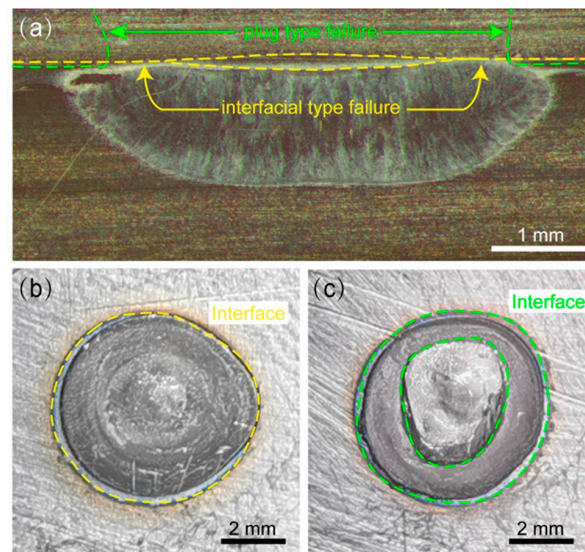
Fracture interface morphologies and fracture locations: (a) nugget morphology of the joint, 8.0 kA, 180 ms, 0.35 MPa, (b) macroscopic fracture interface of interfacial fracture mode, 7.0 kA, 150 ms, 0.35 MPa, and (c) macroscopic fracture interface of button fracture mode, 8.0 kA, 150 ms, 0.35 MPa.
